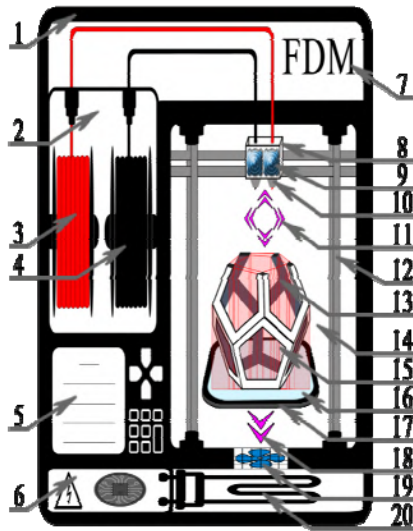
Scheme of the operation principle of FDM 3D printing technology: 1 – FDM 3D printer body; 2 – hermetic compartment for polymer bays; 3 – a bay used as a support for printing a 3D product; 4 – high-temperature bay with CNS; 5 – 3D printer control panel; 6 – electronic part of the 3D printer; 7 – 3D printer printing type (FDM); 8 – high-temperature 3D printer head for printing; 9 – cooling mechanism of the high-temperature head; 10 – high-temperature head nozzle; 11 – the direction of movement of the high-temperature printing head; 12 – guides for the movement of the construction platform and the print head; 13 – printed 3D product support; 14 – camera for building 3D products; 15 – 3D products with the CNS; 16 – special coating of the working 3D printed table; 17 – a platform for building 3D products; 18 – the direction of movement of the working 3D printed table; 19 – temperature pump in the printing chamber; 20 – a heating element with a thermocouple
